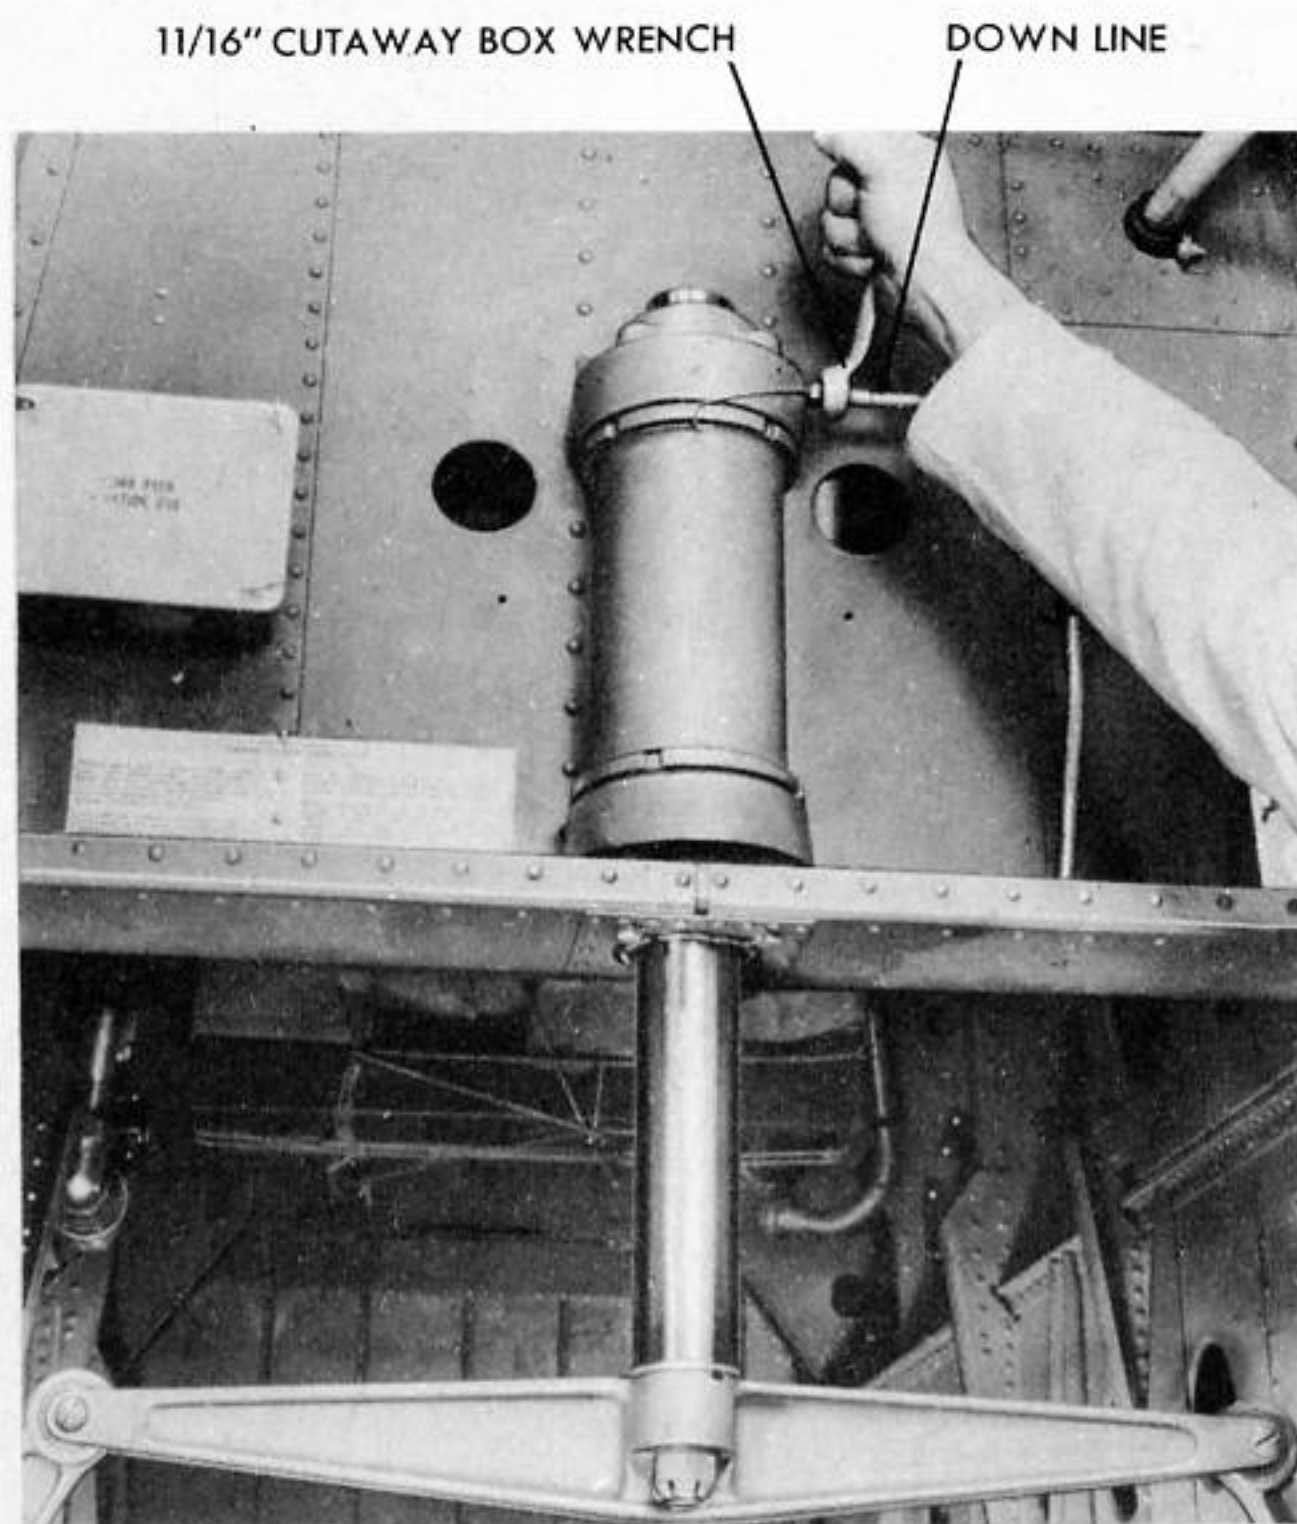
REMOVING BOMB BAY DOOR ACTUATING STRUT
